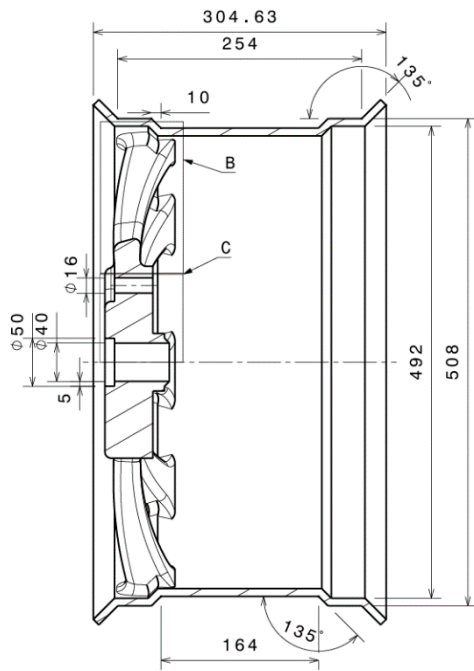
Sectional view of the wheel rim showing internal packaging volume
